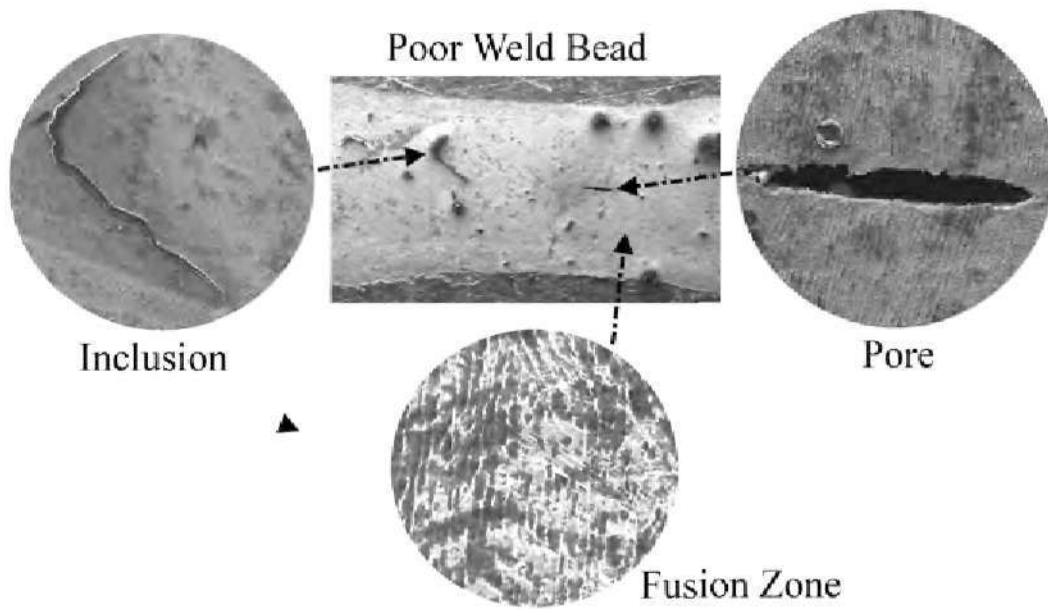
Macrograph of a poorly-formed weld bead
